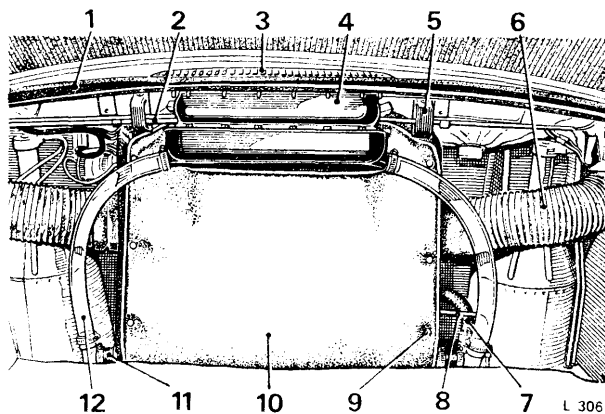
POSITION OF THE EVAPORATOR BOX ASSEMBLY
